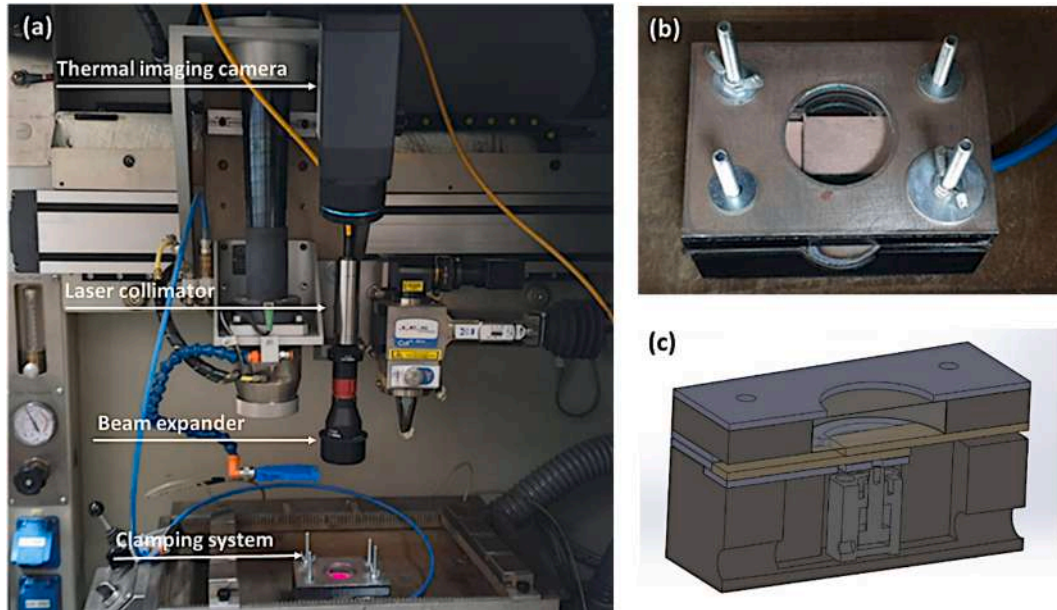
Joining setup: (a) overall view; (b) detail of clamping system; (c) cross-section of the clamping system.
